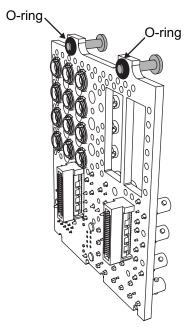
Location of the O-ring on the R3B-GATOR or R3A-GATOR Rear Module
